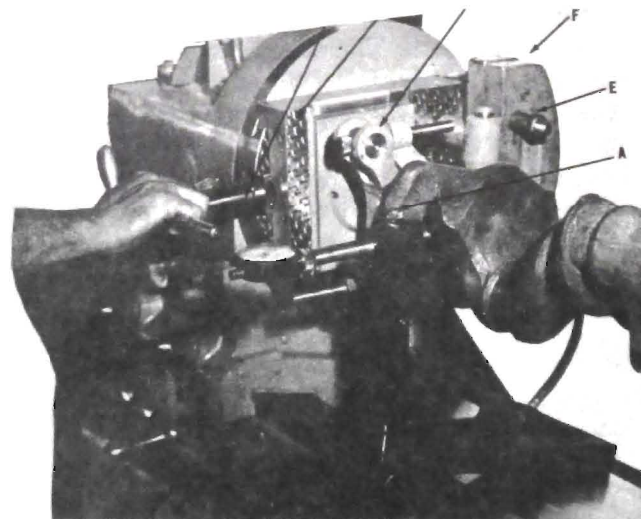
Adjusting Vertical Slide for Stroke Run-out
